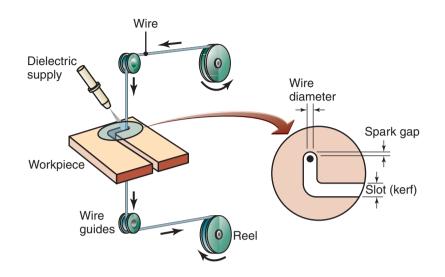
Schematic illustration of the wire EDM process. As many as 50 hours of machining can be performed with one reel of wire, which is then discarded.
